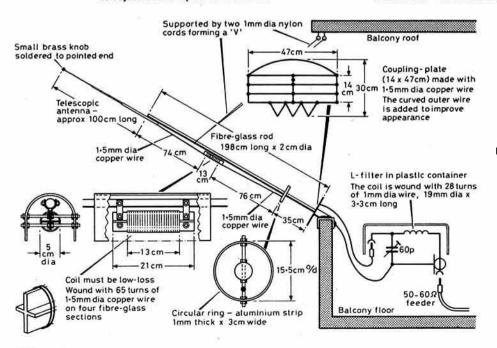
Constructional details of the DL6FY balcony-mounted mini-dipole
